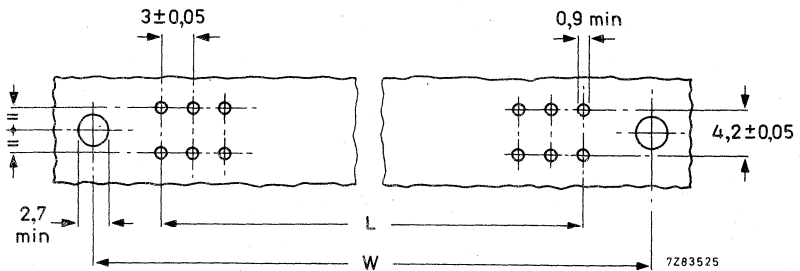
Hole pattern for a male part with straight dip-solder pins.
